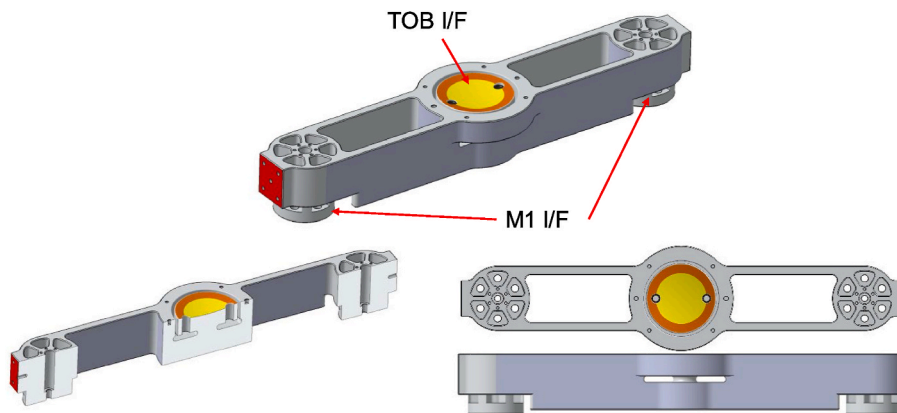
Isometric and section view of the Flexure Hinge CAD.
